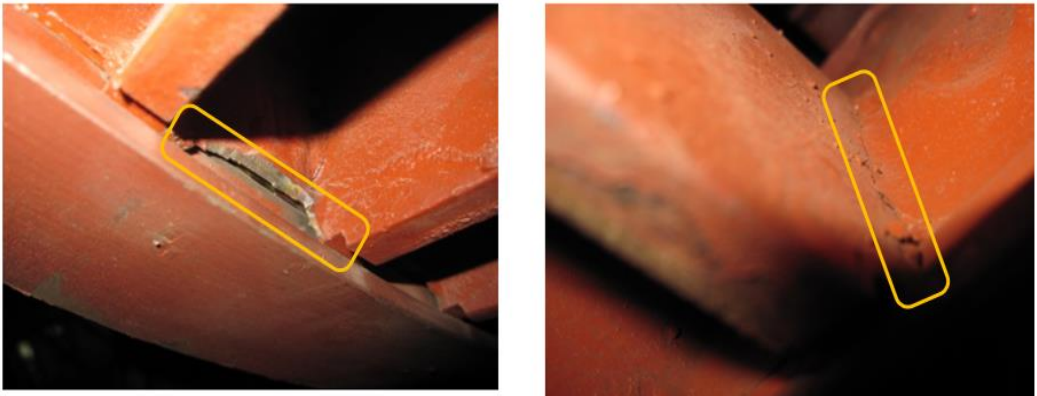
The squirrel cage rotor of a 5 MW motor of the thermal power plant, Cracks in the rotor bars from the connection to the end ring.
